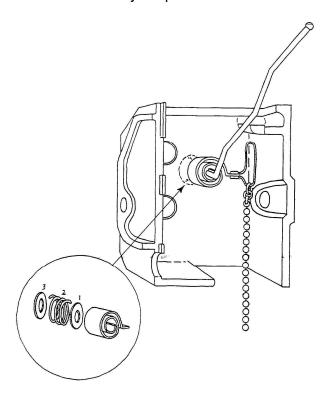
Primary air thermostat housing assembled. The bold line (1) shows the lever in its proper position for assembly. The dot-dash line (2) shows the lever in its proper position for installation on the stove back.
